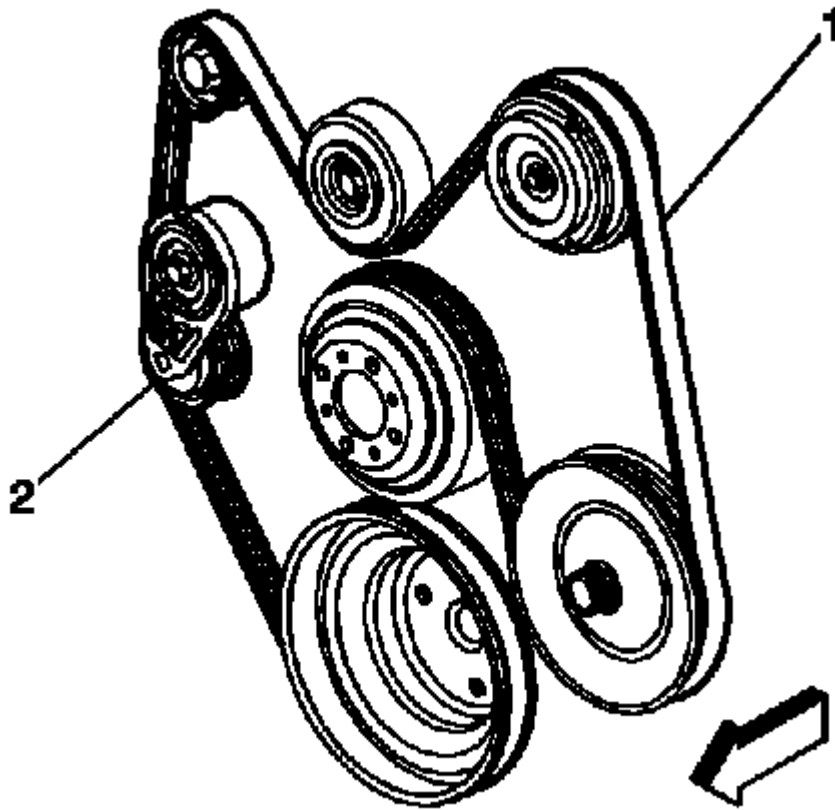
Drive Belt Routing & Tensioner (W/ A/C)
